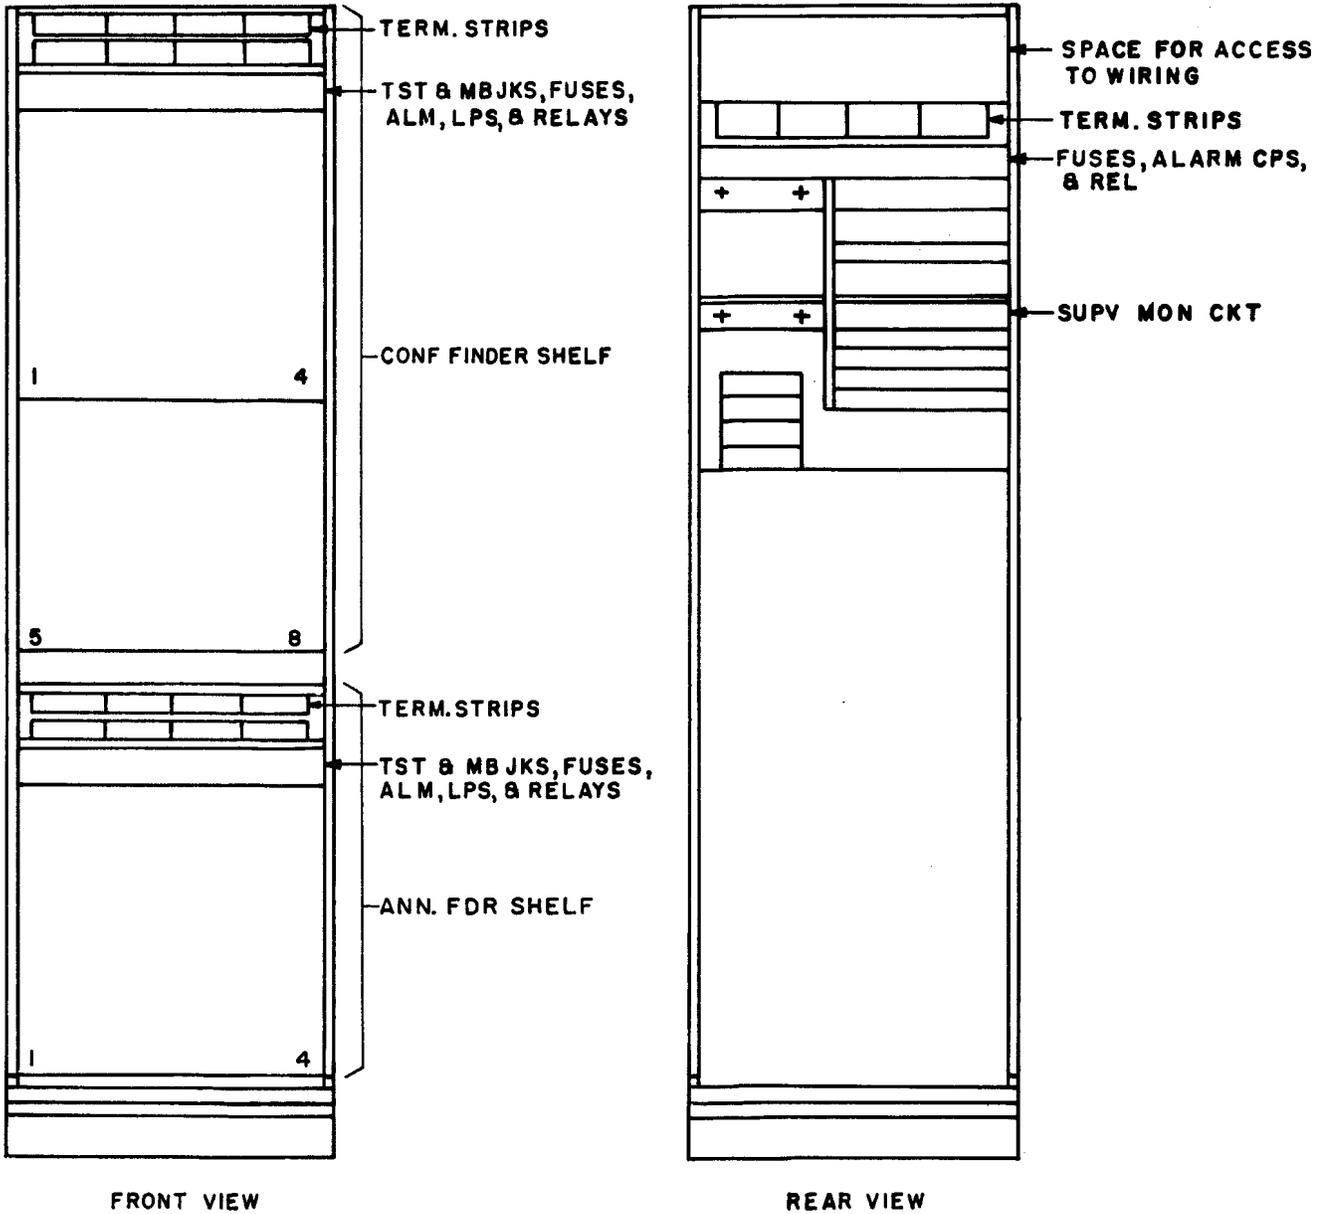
Typical Equipment Arrangement For Conf Finder Shelf, Ann. Finder Shelf and Supervisory Monitor Circuit Mounted on Rel Rk Type SW FR
